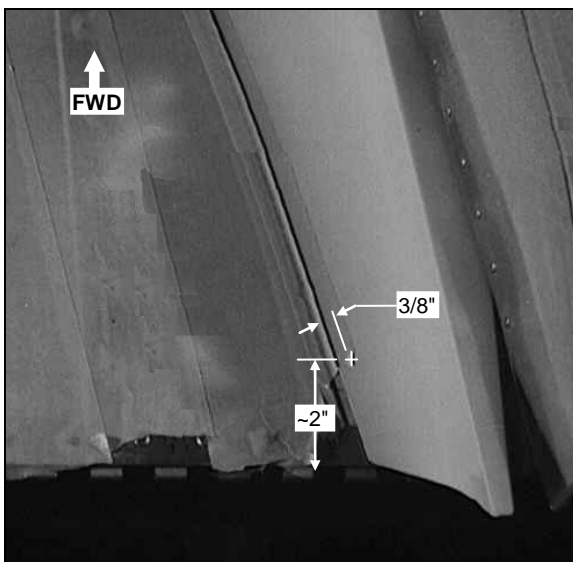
shows the location of the third and final mounting screw hole on each side of the fairing. Mark this location 3/8" inboard of the lower edge of the fairing and about 2" forward of the trailing edge of the stabilizer. Drill through the fairing and the upper surface of the stabilizer skin at each mark with a #19 bit.
